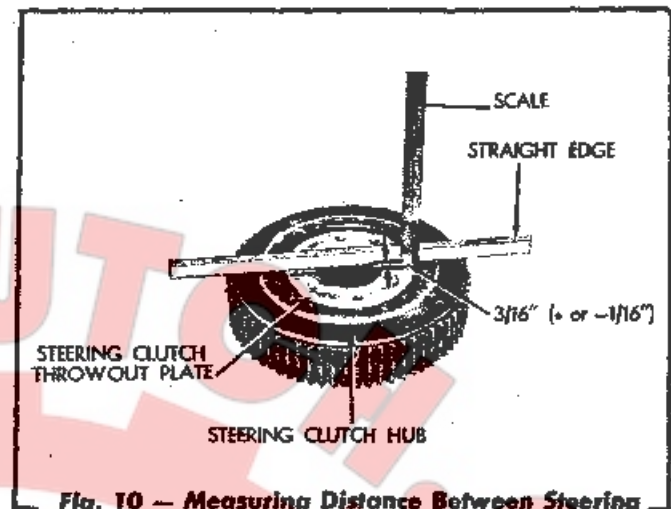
Measuring Distance Between Steering Clutch Hub and Throwout Plate
